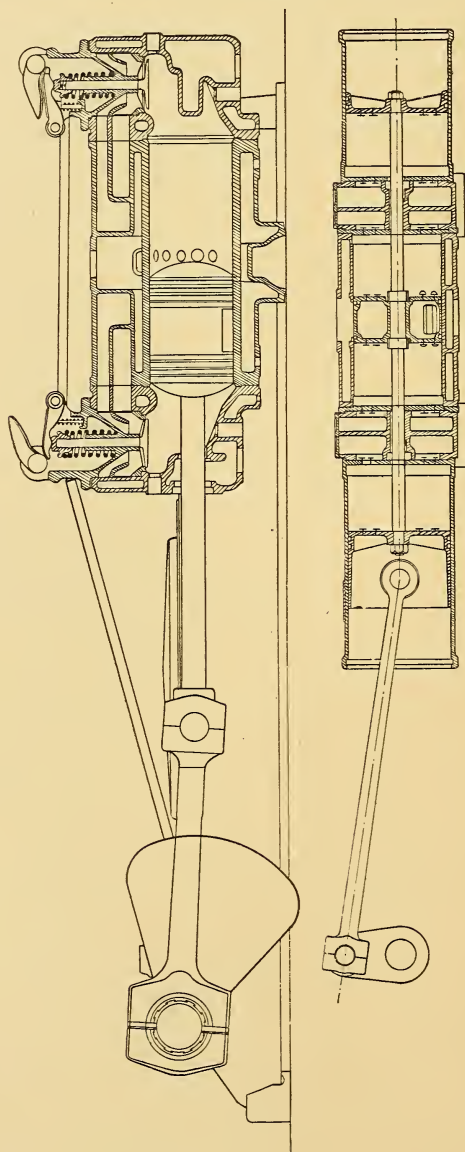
Longitudinal Section of Two Cycle Engine (Koerting)—new type, by Messrs. Mather and Platt. Power cylinder above. Gas and Air pump below. Note inlet valves at each end and length of piston in power cylinder.
